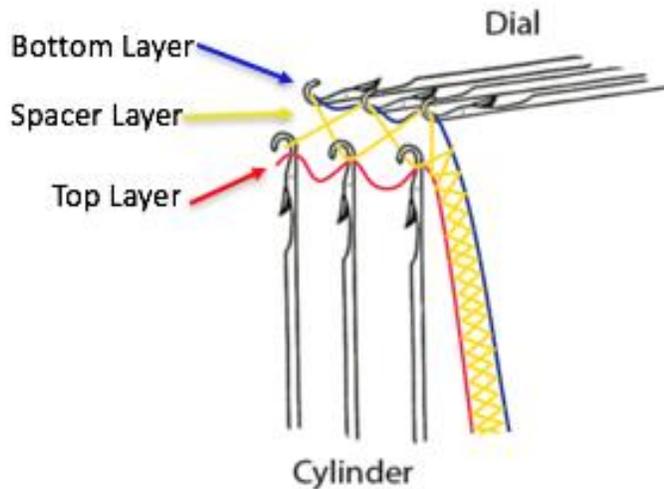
Example of circular spacer knit fabric on double jersey machine.
